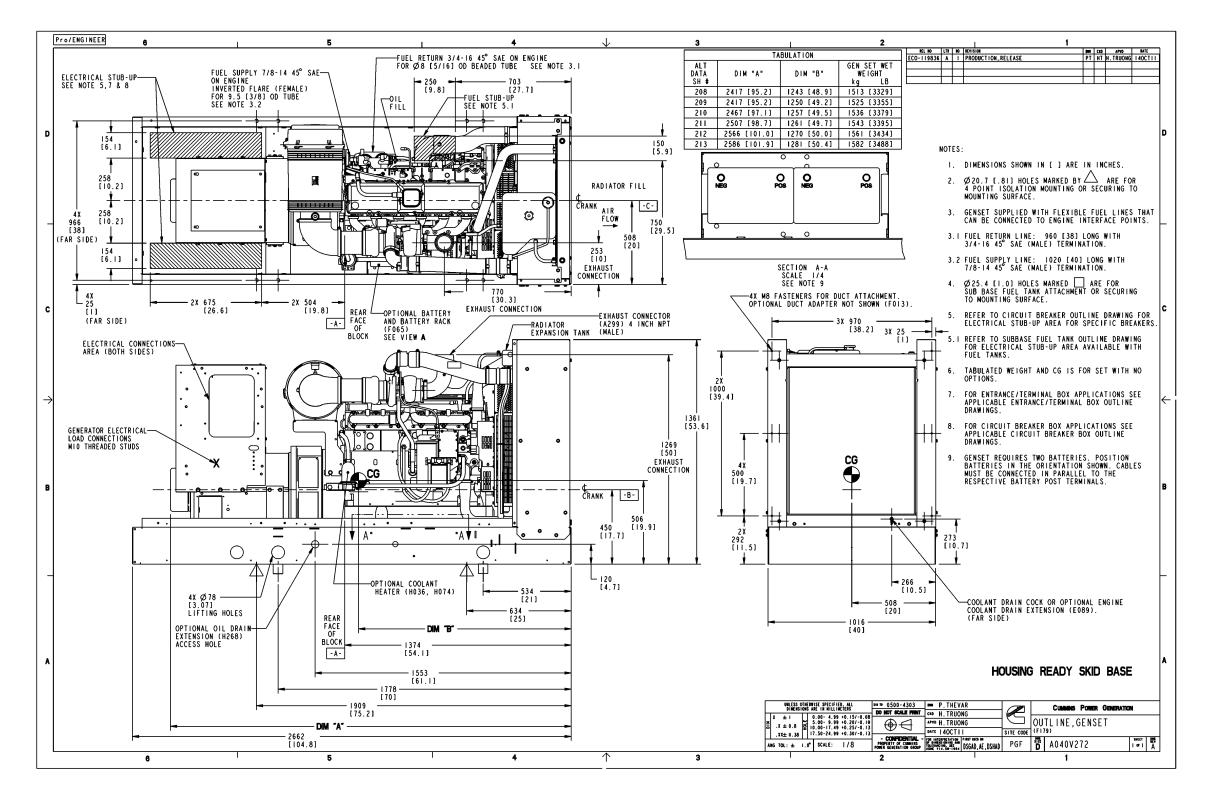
OUTLINE DRAWING - HOUSING READY SKID BASE (SHEET 1)
